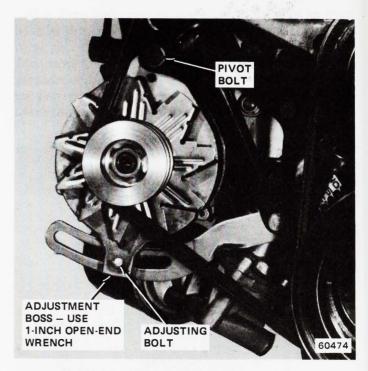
C-17 Alternator Adjustment—Eight-Cylinder
